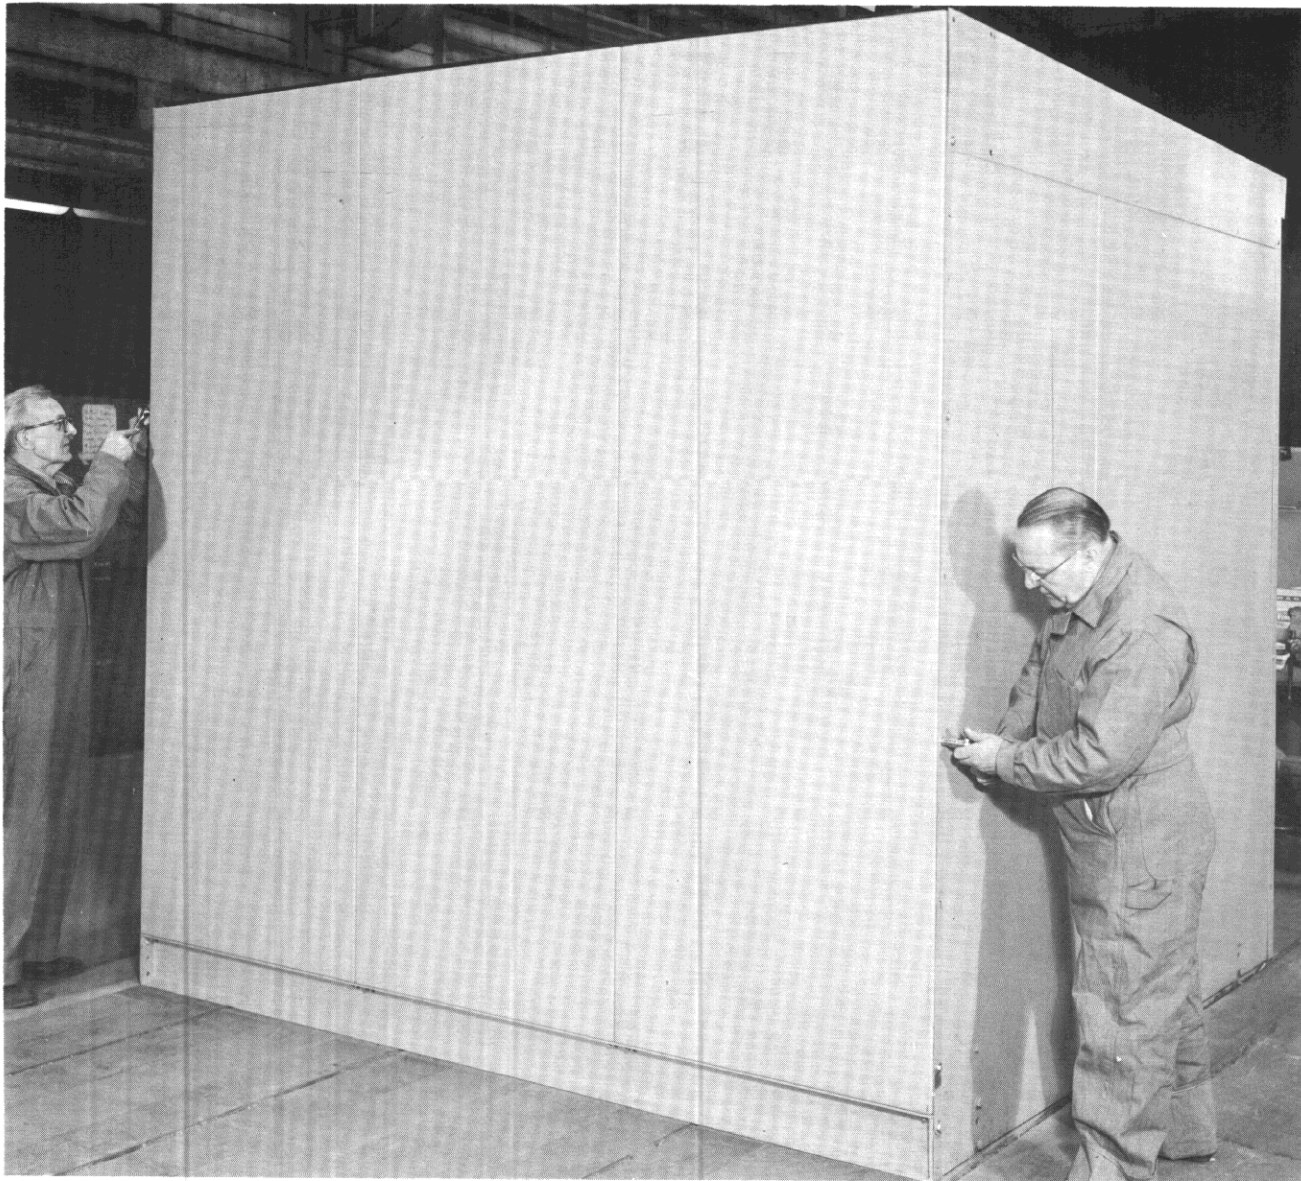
Remove Shipping Bolts Holding Aisle Front Panels in Place
